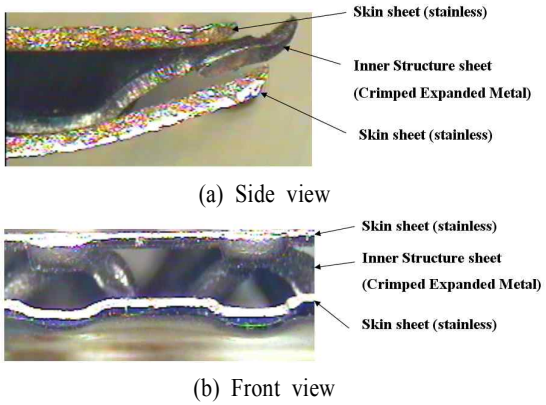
Sheared surface of ISB sheet metal at position 1 (resistance-welded)
